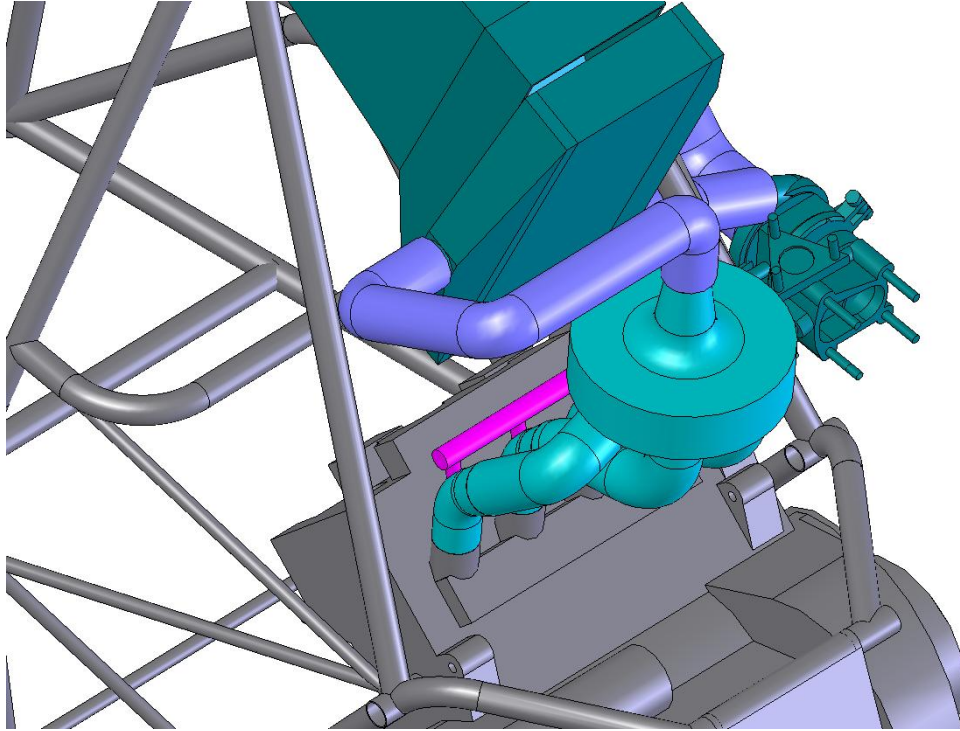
Third set of silicone hoses. (Modeled by D. Curran, engine/chassis by FSAE team)
